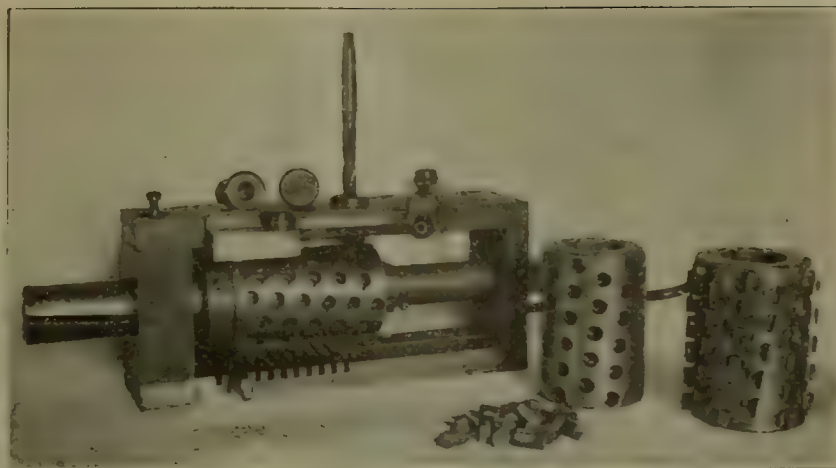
Jig for High Speed Inserted Peg Milling Cutters. At the Right Is a Completed Cutter.
